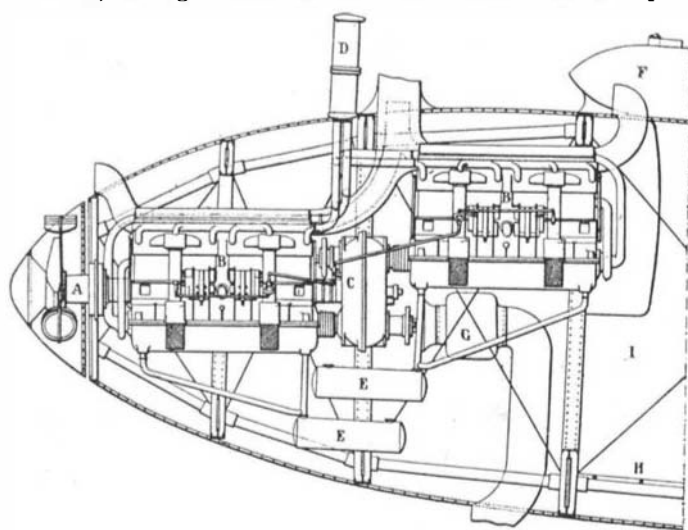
ENLARGED VIEW OF THE BOW OF THE BREGUET BIPLANE
